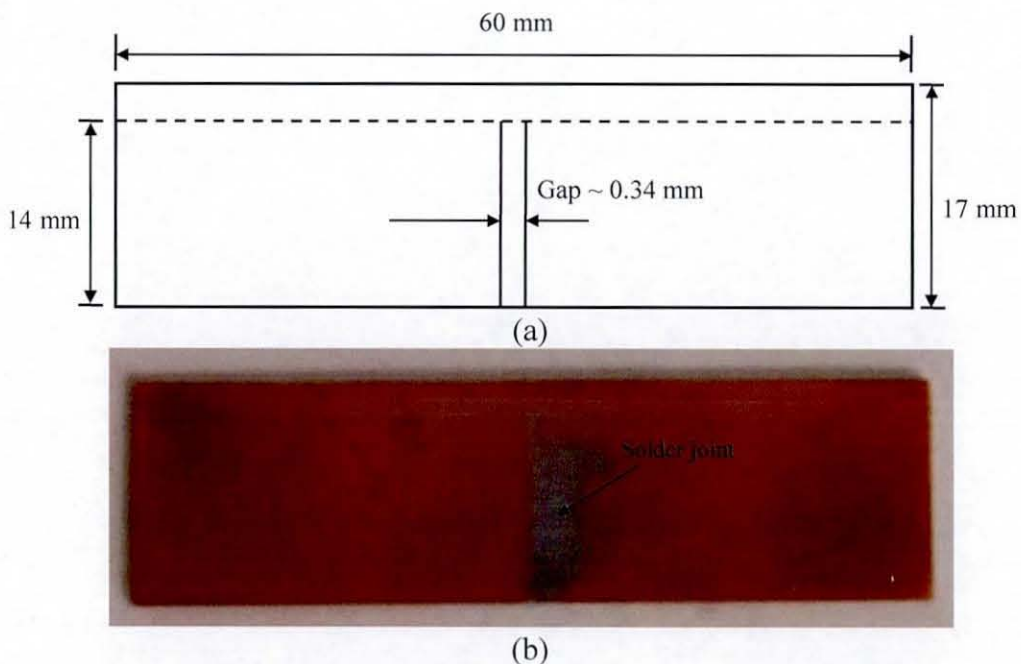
Solder joint specimen fabrication: (a) dimensions of the copper pieces used; (b) an actual sample after reflow
